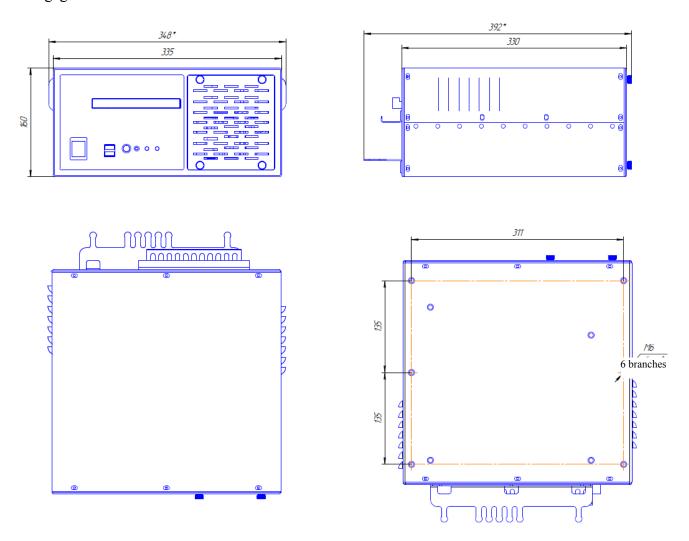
Dimensional Drawing of the Mainframe without Brackets
